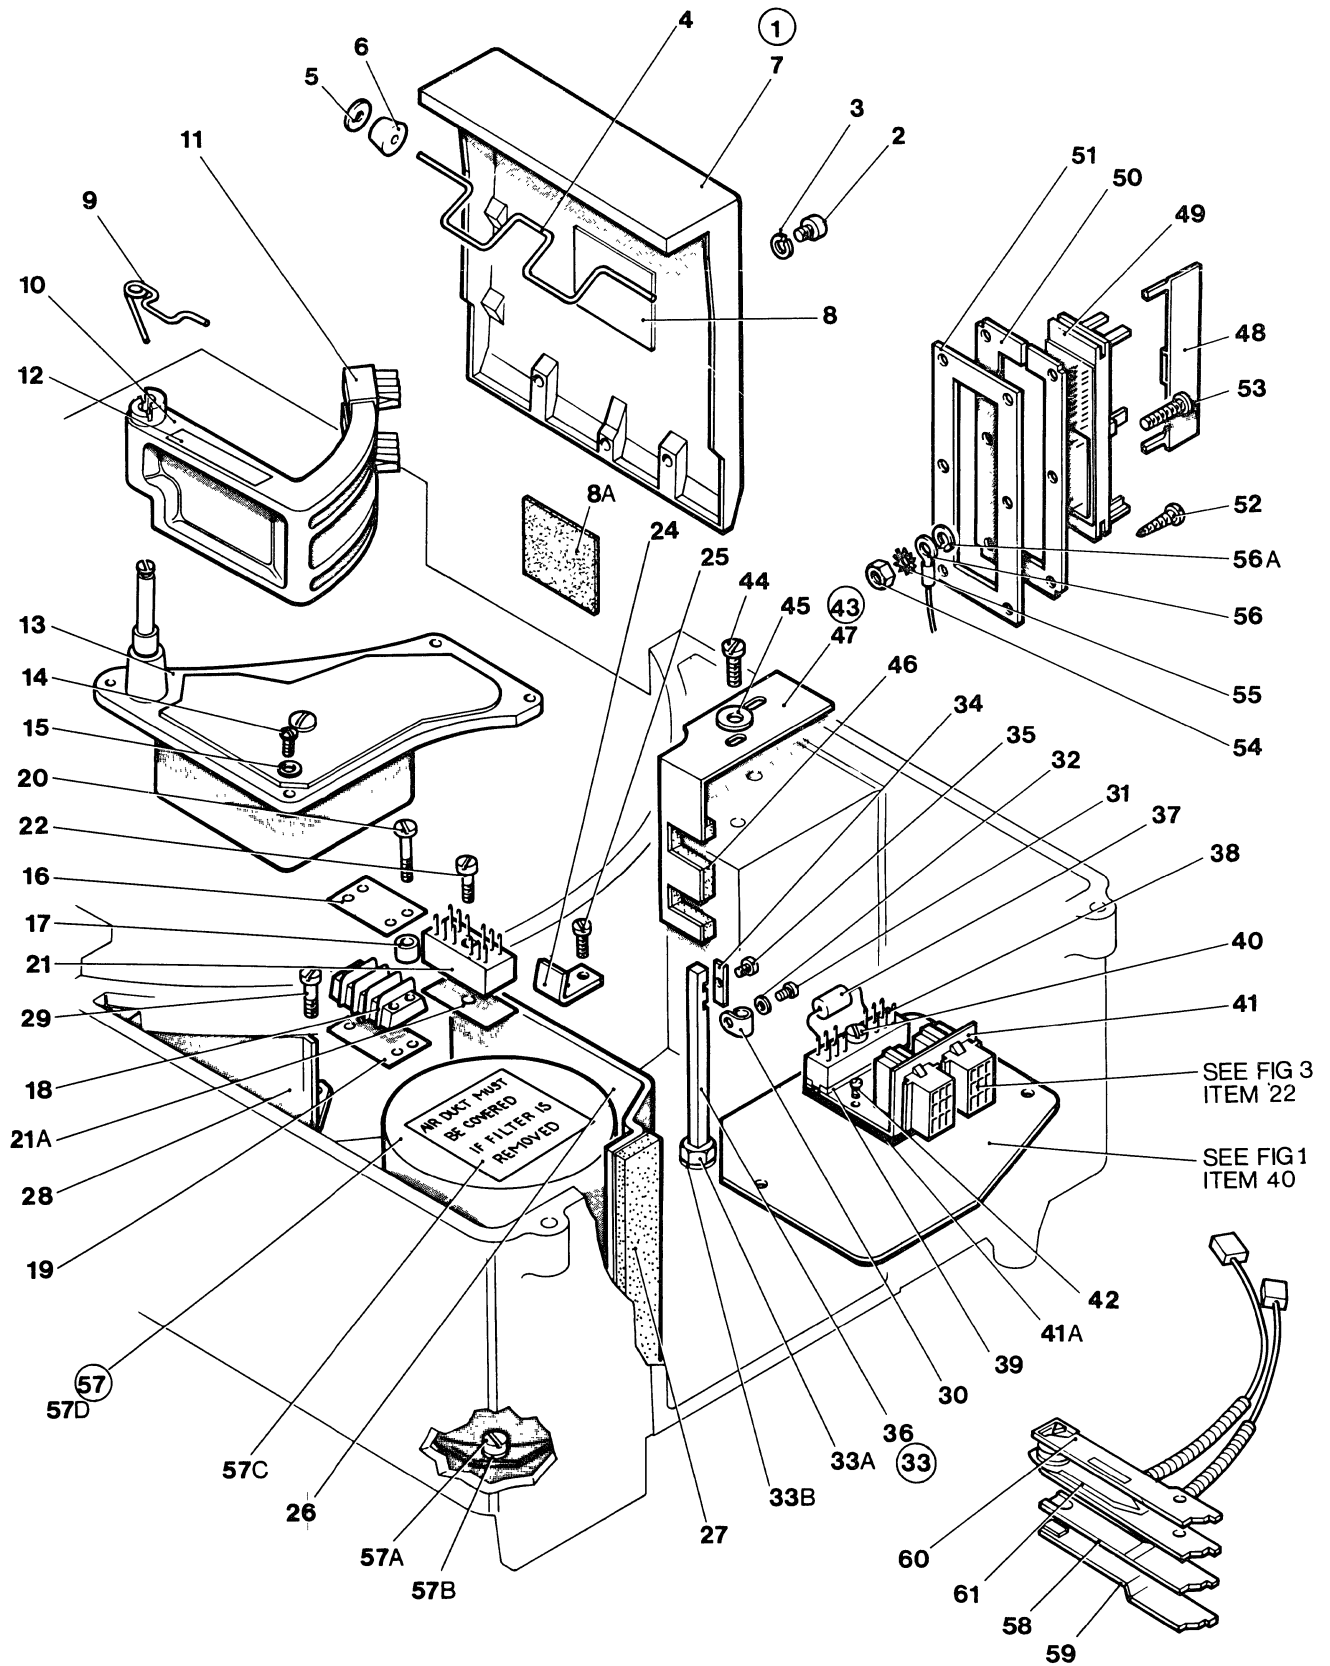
5444 DISK FILE, FINAL ASSEMBLY (PART 1 OF 4)
